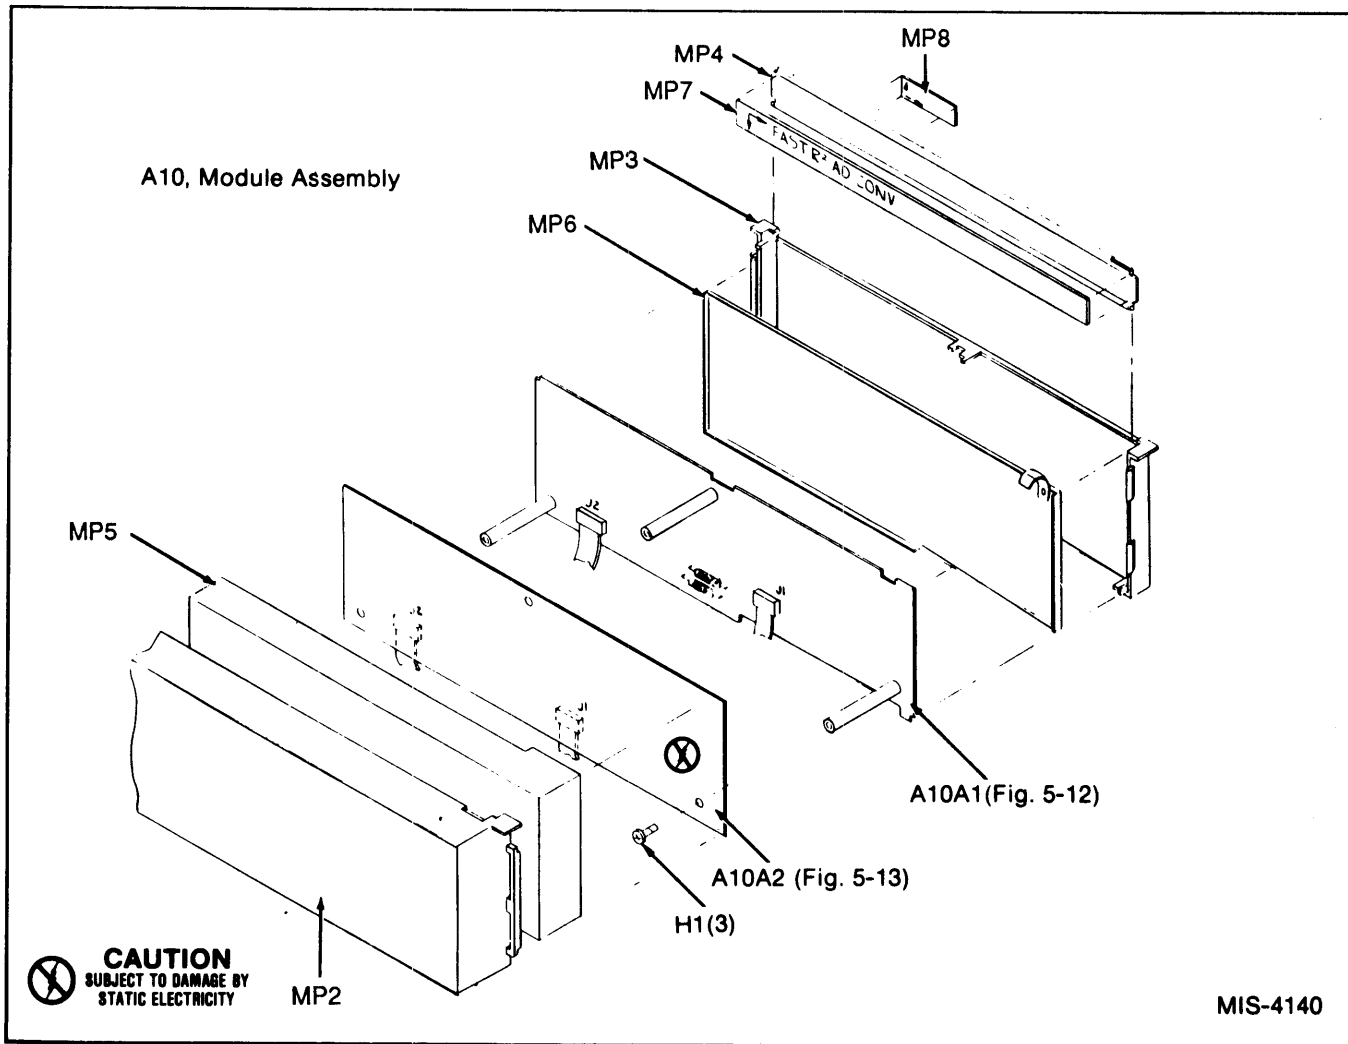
A10 Fast R2 A/D Converter Assembly
